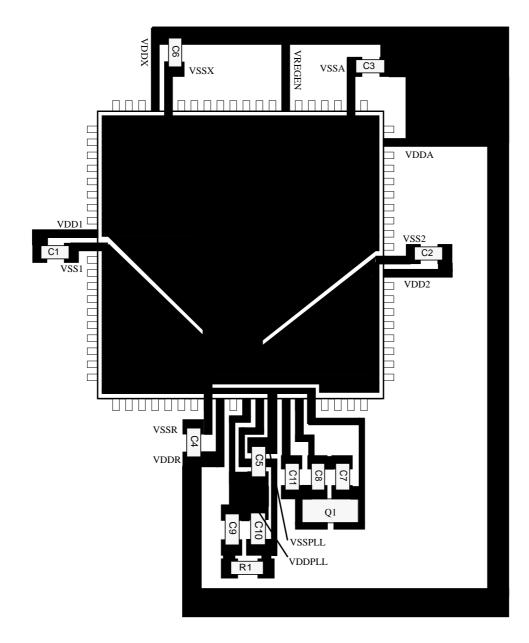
Recommended PCB Layout for 80QFP Colpitts Oscillator
